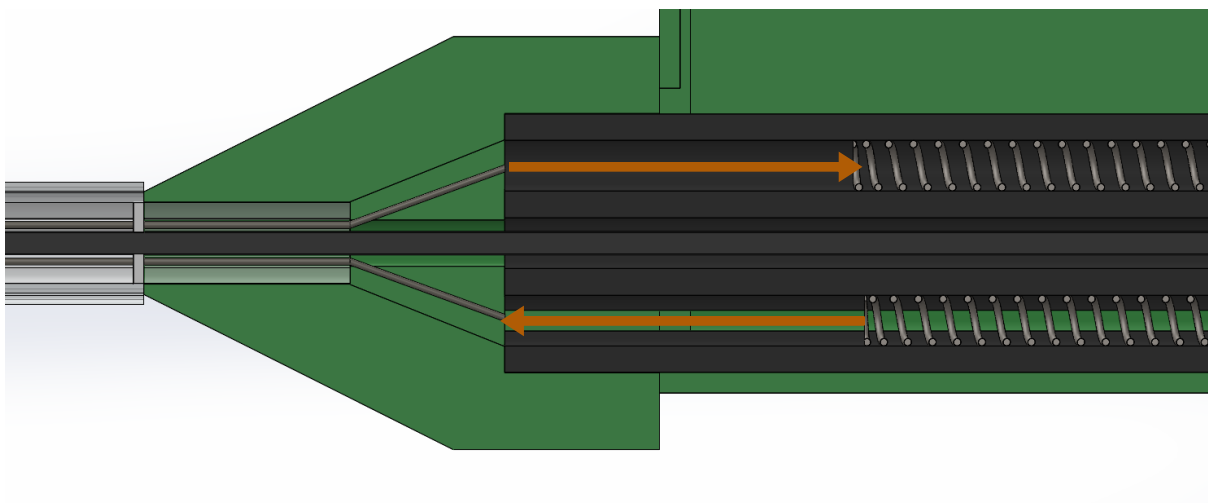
Prototype 2 Bending Mechanism. The bending mechanism implemented shape memory alloy springs that acted as pairs, when one contracts the opposite spring extends.
